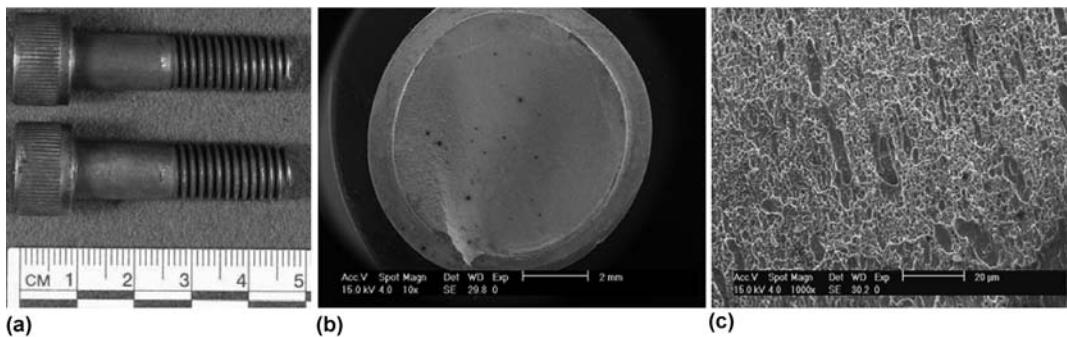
Fracture of an ISO 12.9 bolt by ductile torsional overload. (a) Overall view of fracture. (b) Smooth and fibrous fracture as seen through the SEM. (c) Microvoid coalescence (dimples)
